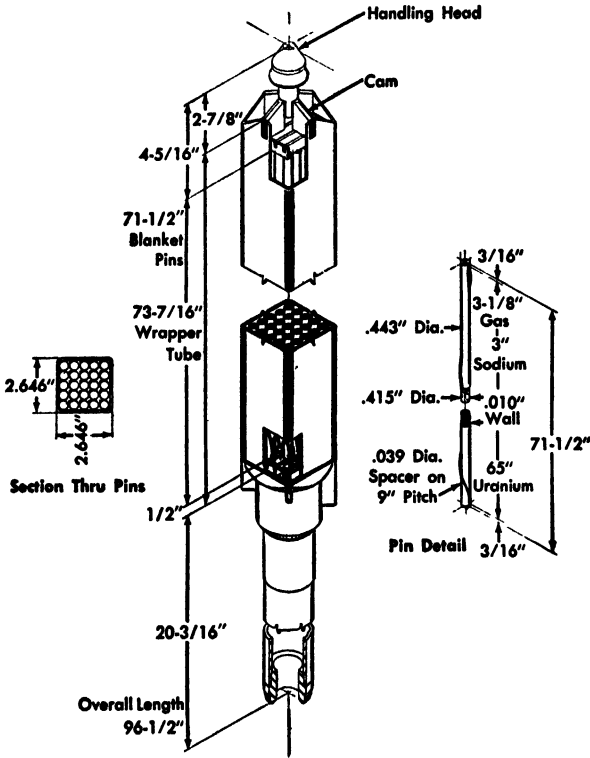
Cutaway drawing of the Enrico Fermi Reactor radial blanket subassembly.
